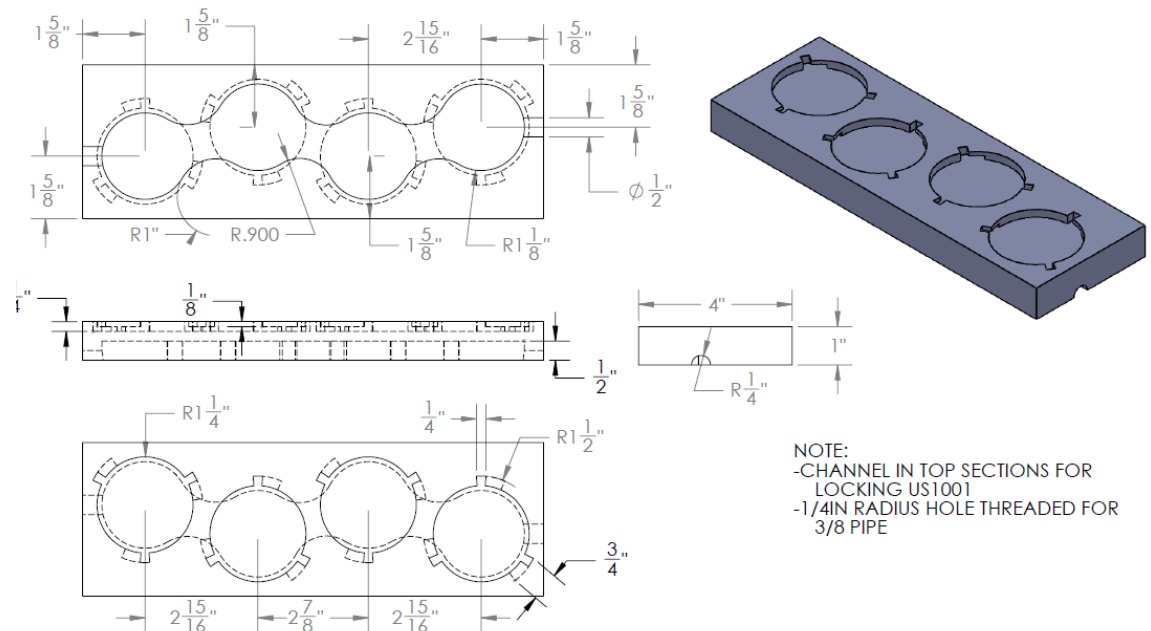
Engineering drawing of concept for one side of the ultrasonic emulsification chamber.
